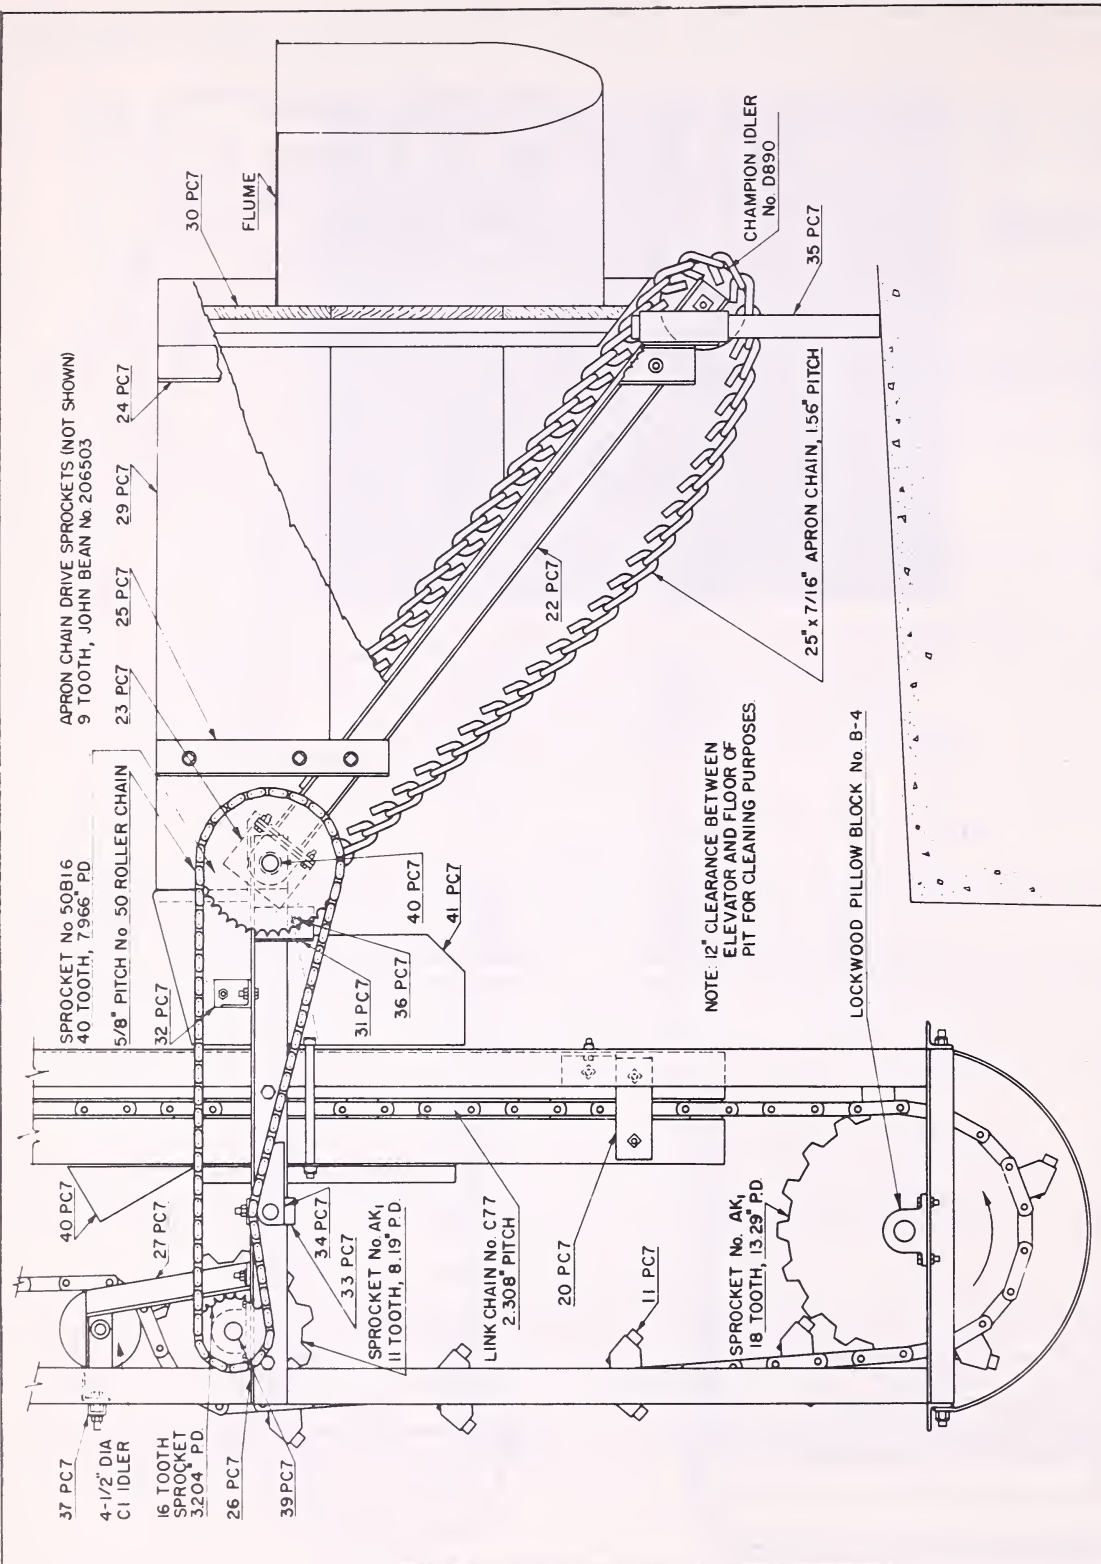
Details of lower part of elevator frame and feeder assembly.
